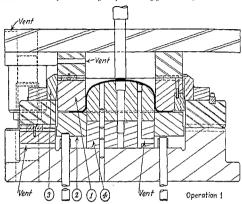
A. Combination cylindrical and elliptical draw die, operation 1. (Right Tool & Die Co.)
